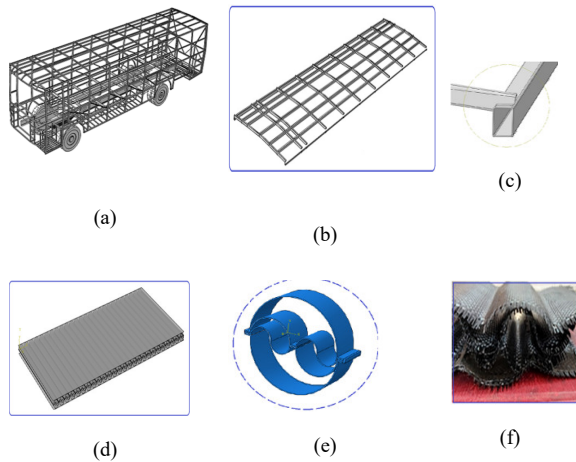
An 8 ton bus roof panel equipped with multi-layered semi-circular corrugated woven CFRP plate: (a) Bus roof panel; (b) Conventional roof panel; (c) Rectangular cross section of conventional roof panel; (d) Roof panel equipped with multi-layer semi-circular corrugated woven CFRP unit; (e) Corrugated woven CFRP unit cross section; (f) Corrugated woven CFRP unit
